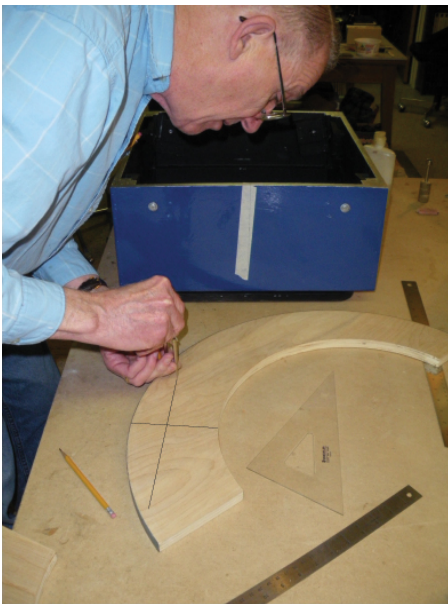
Phil Johnson has laid out a line perpendicular to the side bearing vertical. Two bolts placed on this line will attach the bearing to the box. He has chosen a point of attachment and is using a compass to check that the spacer will not project beyond the line of the side bearing.
